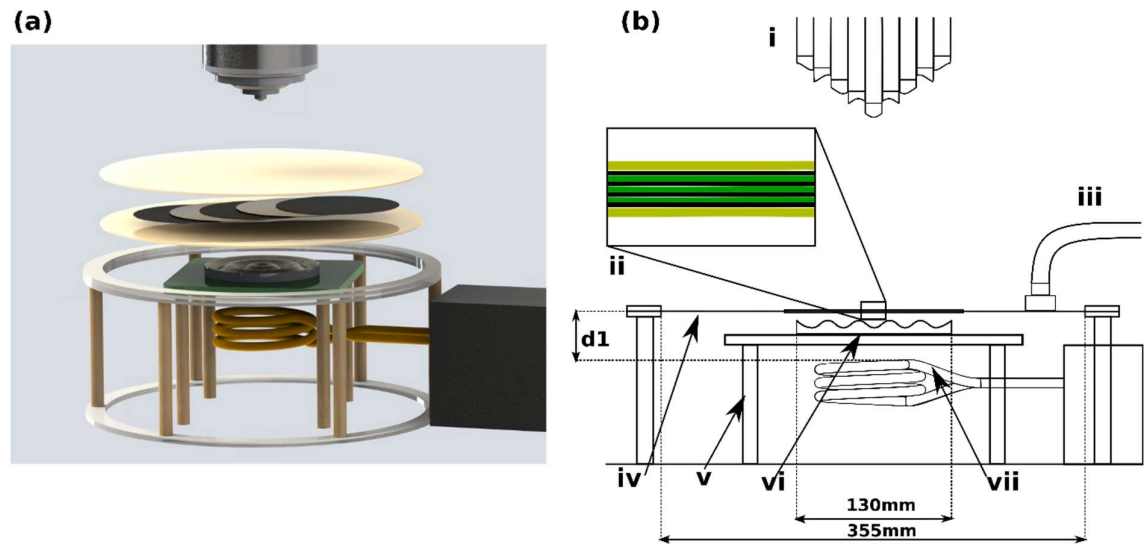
(a) 3D construction of thermoforming set up with diaphragm and samples exploded (b) Sectioned schematic of the induction thermoforming setup showing: (i) multistep male tooling with segmented ripple tooling attached, (ii) exploded view of tin and nylon layup (yellow represents the silicone diaphragm sheets, black is carbon-nylon composite and green is tin interlayer), (iii) vacuum pump connector, (iv) blank holder, (v) epoxy-glass fibre false base plate, (vi) female ripple tooling and (vii) solenoid induction coil.  $d1$  refers to the distance between coil and Sample.  $d1 = 25$  mm for forming of flat samples, and  $d1 = 60$  mm when forming ripple specimens.
